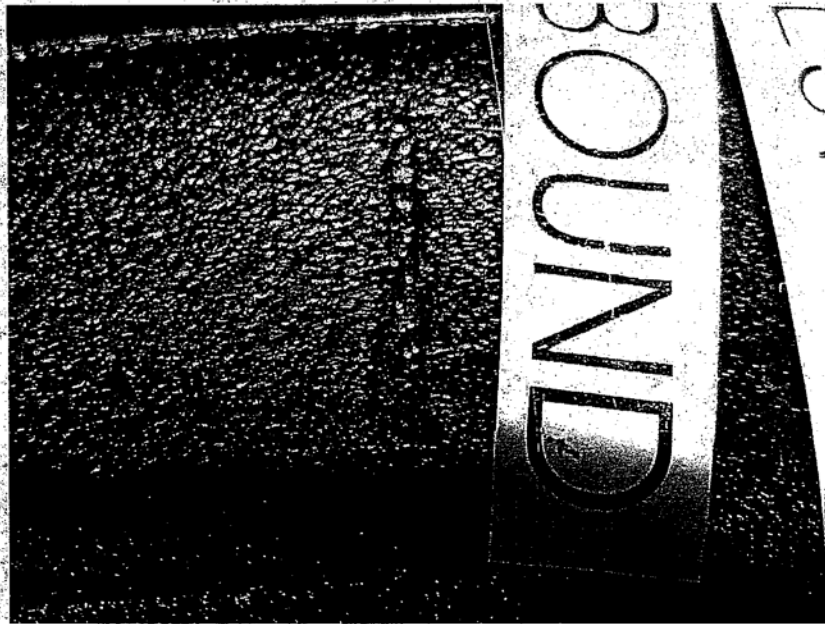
View of Notch after Test under 24 H Igepal for Bound ADS 36 Specimen
